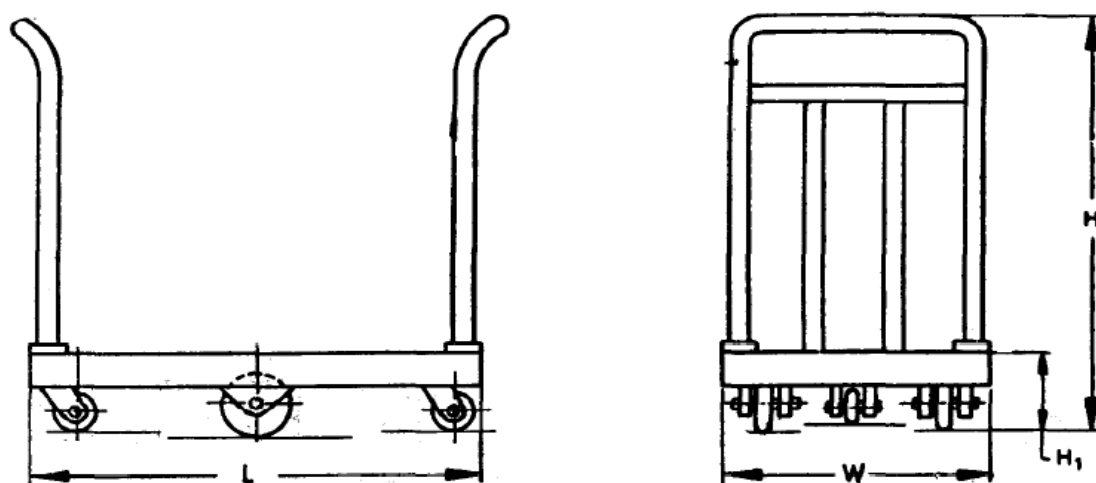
FLAT DECK TRUCK DOUBLE END (LIGHT DUTY)
